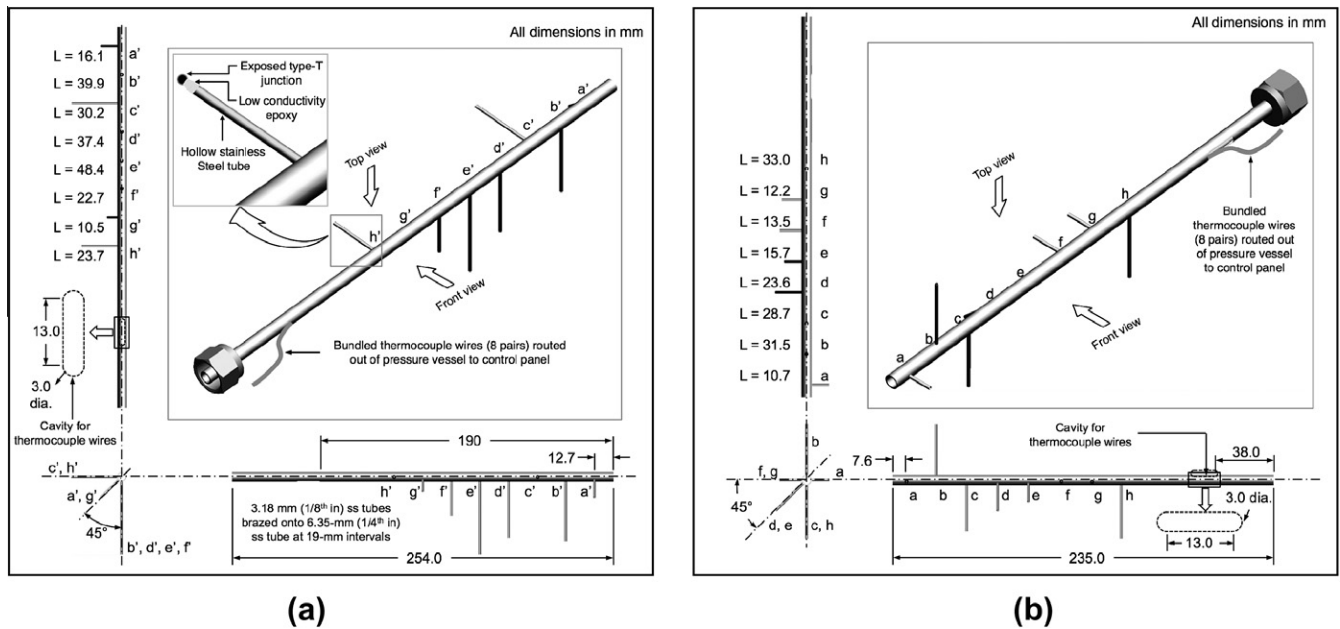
Isometric views and detailed drawings of thermocouple support tubes attached to cover plates of storage vessel on (a) U-bend (left) side and (b) coolant inlet/outlet (right) side of coolant tube.
